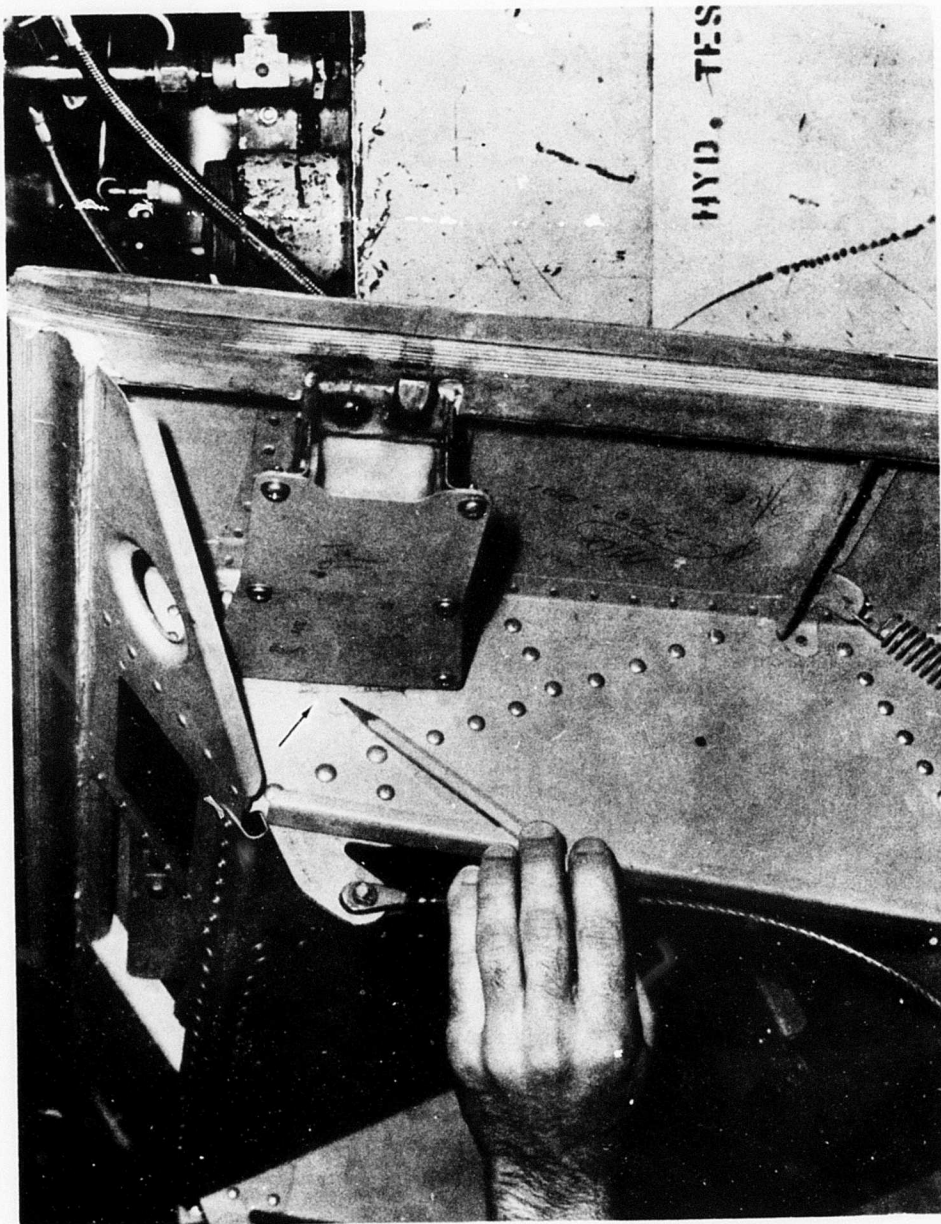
Lower Personnel Door, Side Beam Fatigue Crack.
